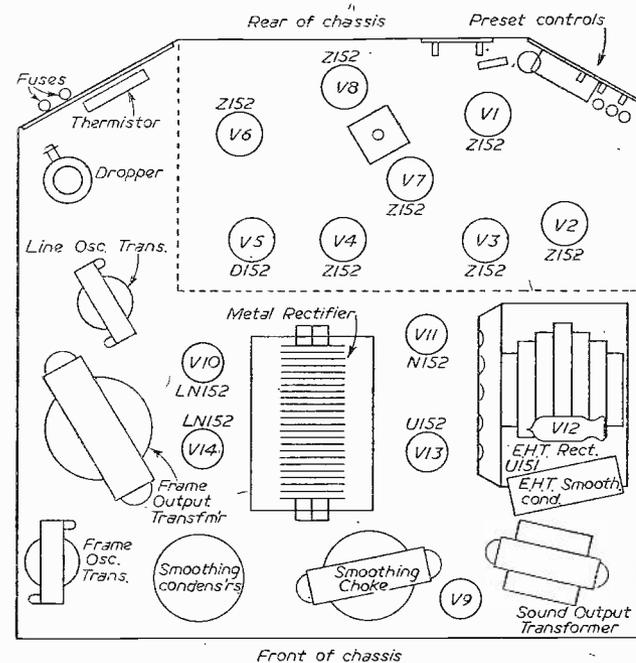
Top view of chassis which is mounted at an angle in console receivers.
